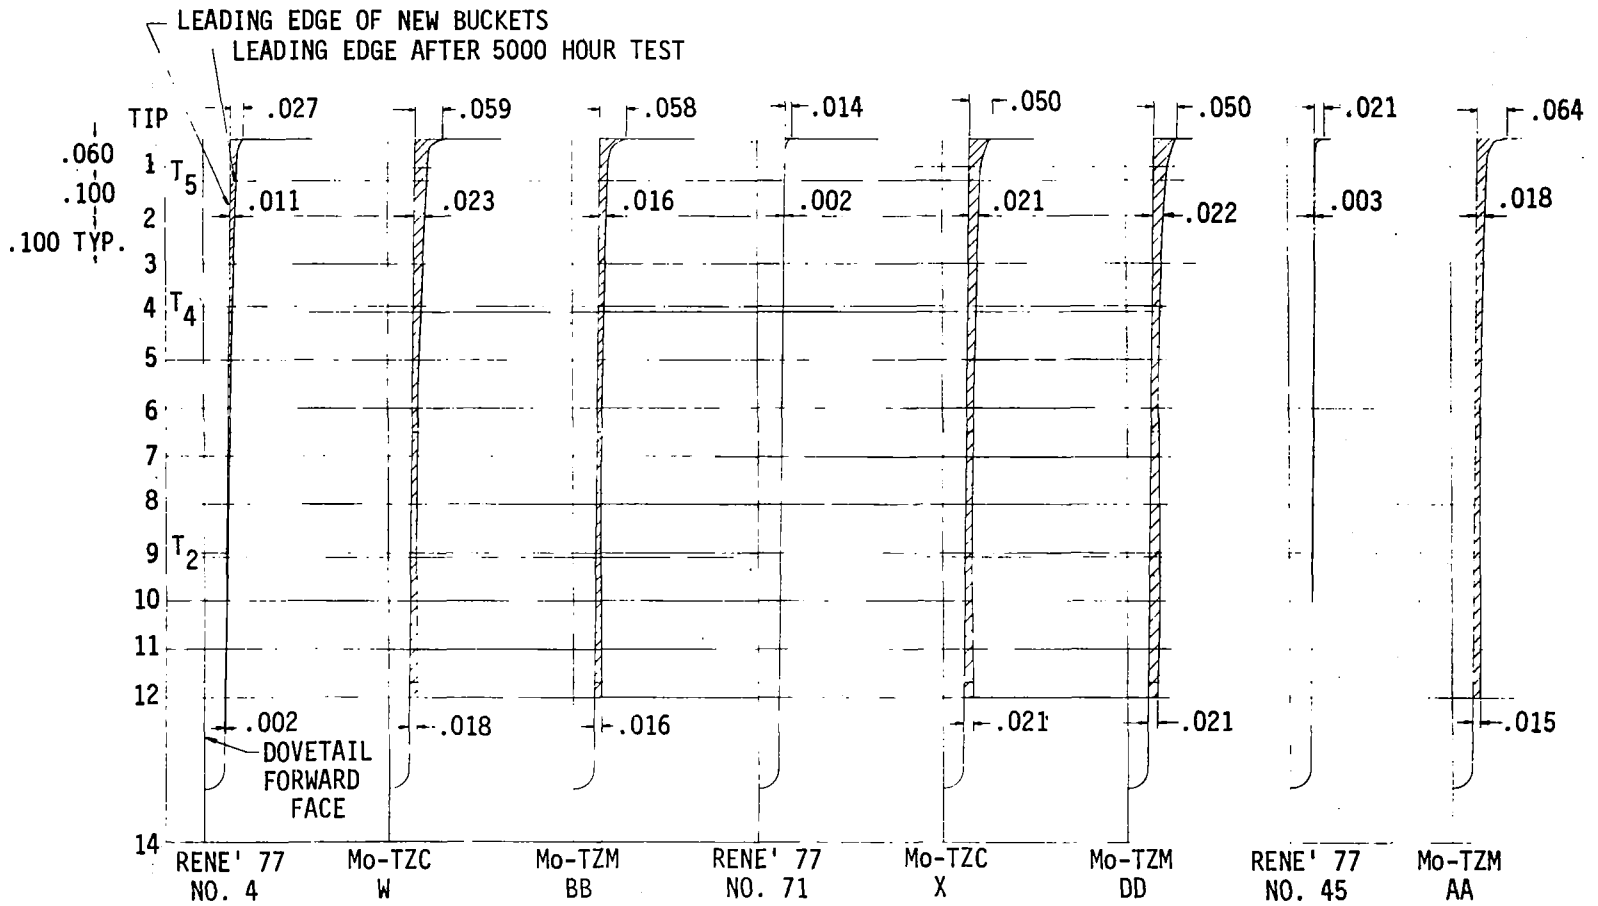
Surface Plate Measurements of Stage 3 Bucket Leading Edges.
